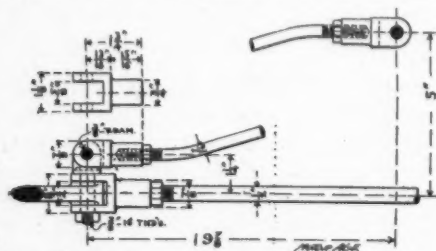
Steering Rod, Jaws, and Connecting Pin.
